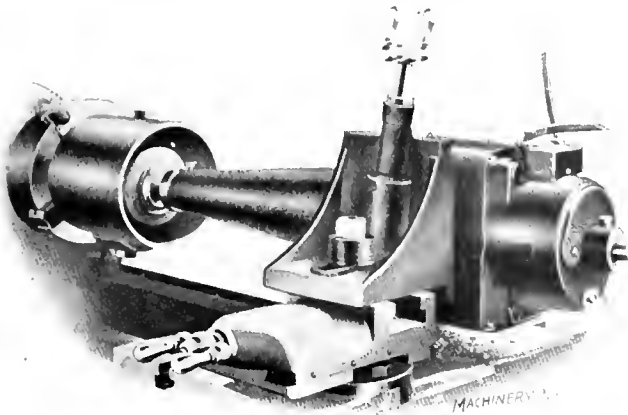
Lathe Grinding Attachment, with Extended Spindle for Internal Work
